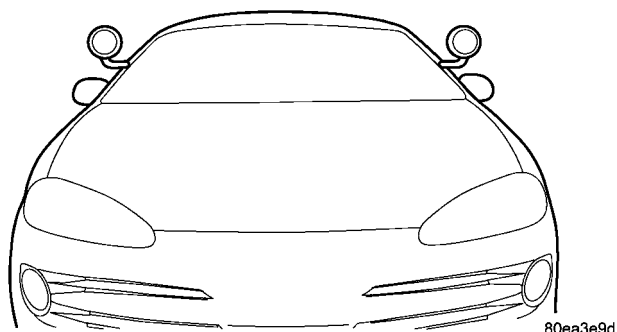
SPOT LAMP ASSEMBLY LOCATION
